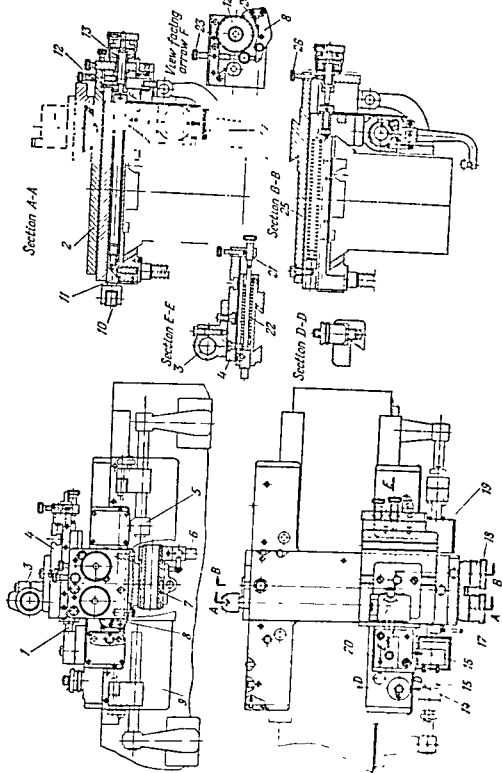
Carriage of the model 101 semiautomatic precision threading lathe
